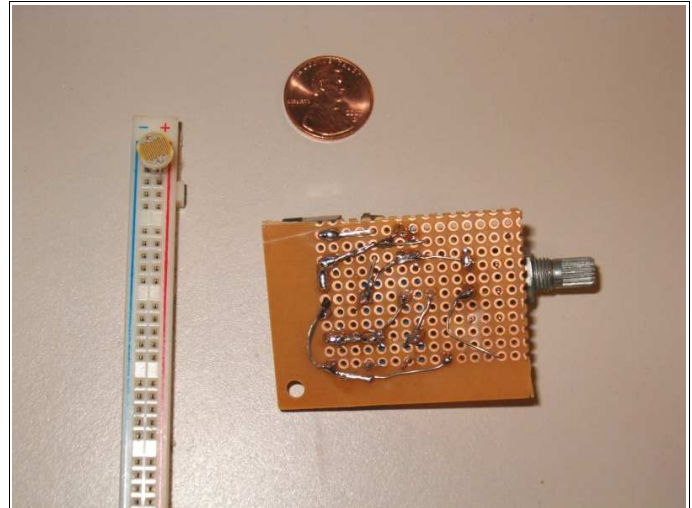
Bottom view of the main light meter circuit board and CdS sensor
